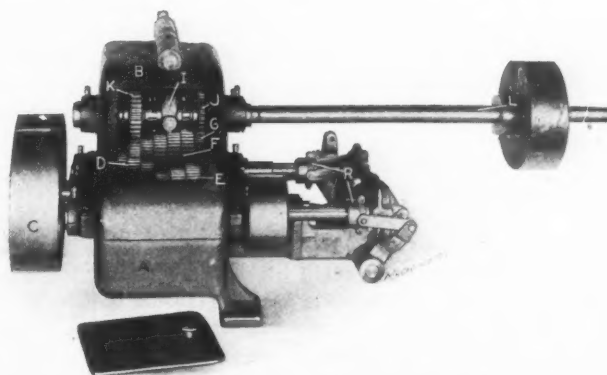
Arrangement of Gears which provide the Feed and Speed Changes
